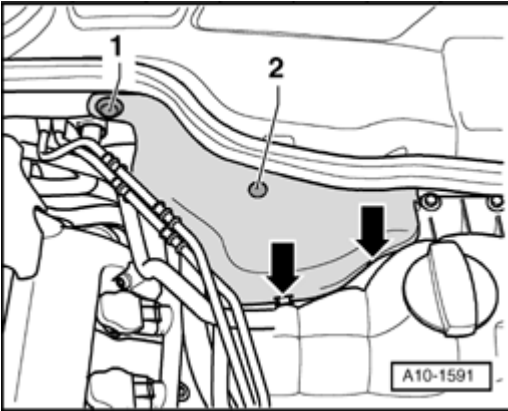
Removing Left Cover By Removing Bolt And Expanding Rivet
